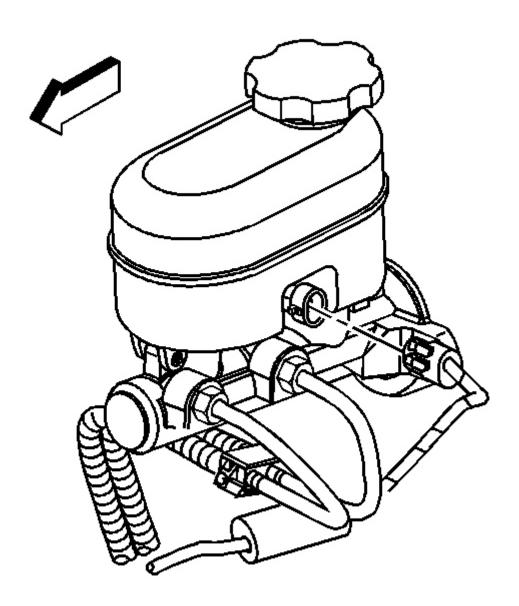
Removing/Installing Master Cylinder Fluid Level Sensor Connector Courtesy of GENERAL MOTORS CORP.
